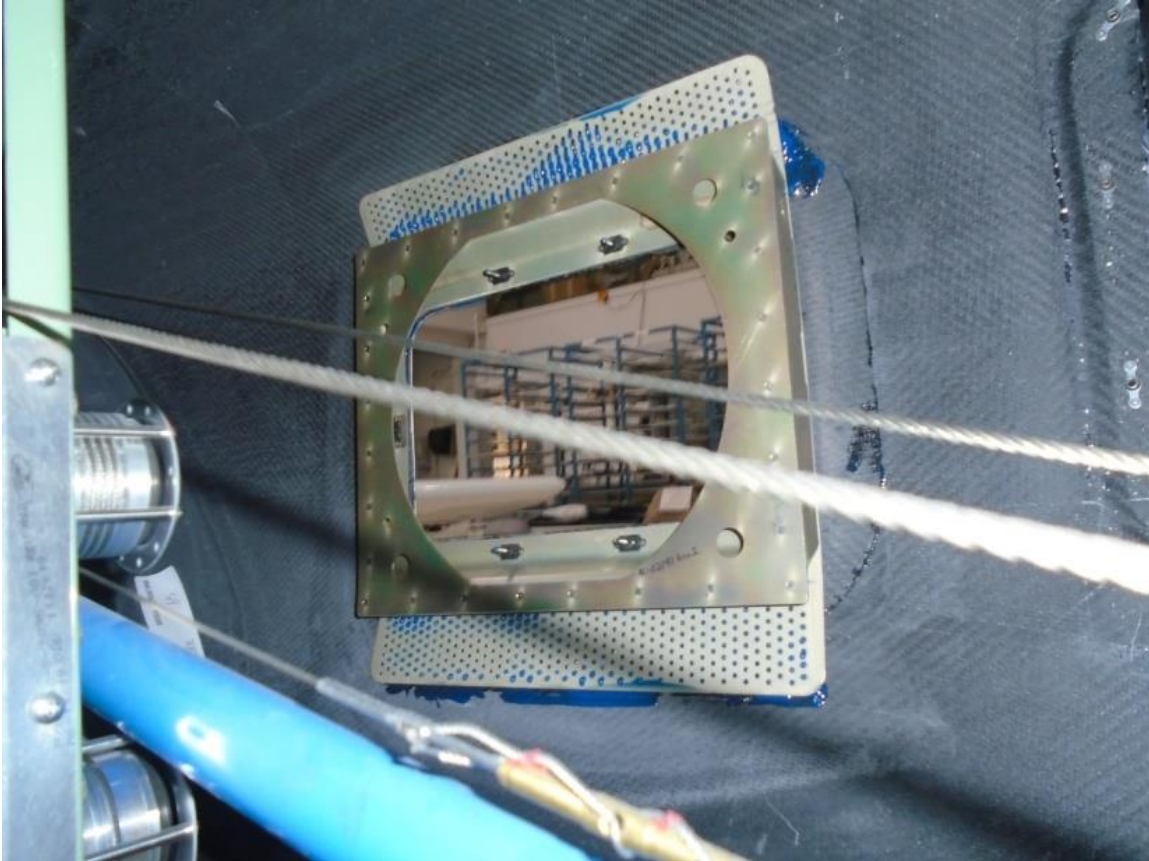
Side Doubler and Condenser Support Assembly Installation
